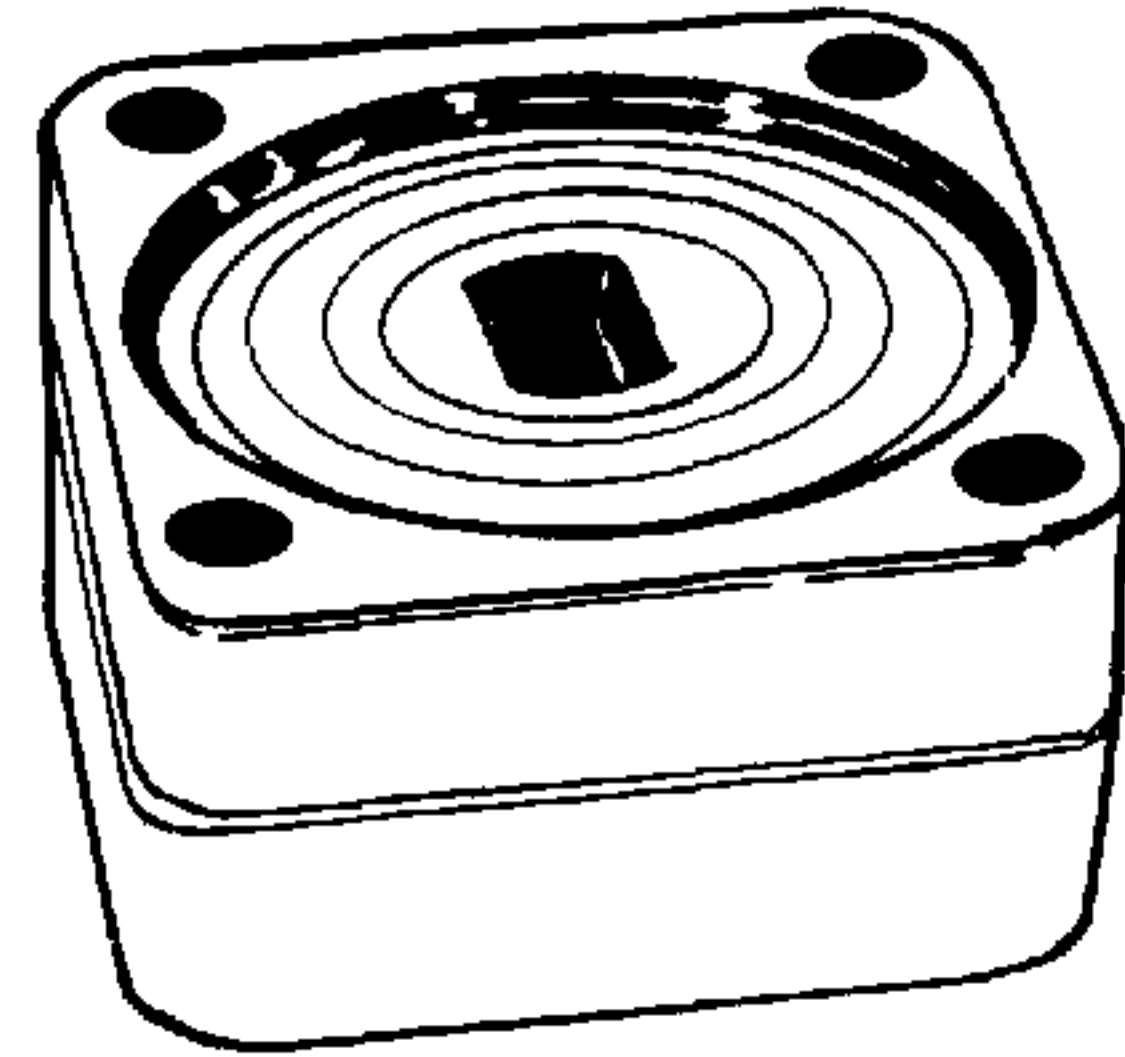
Installing Metering Package and Shims In Metering Ring.
